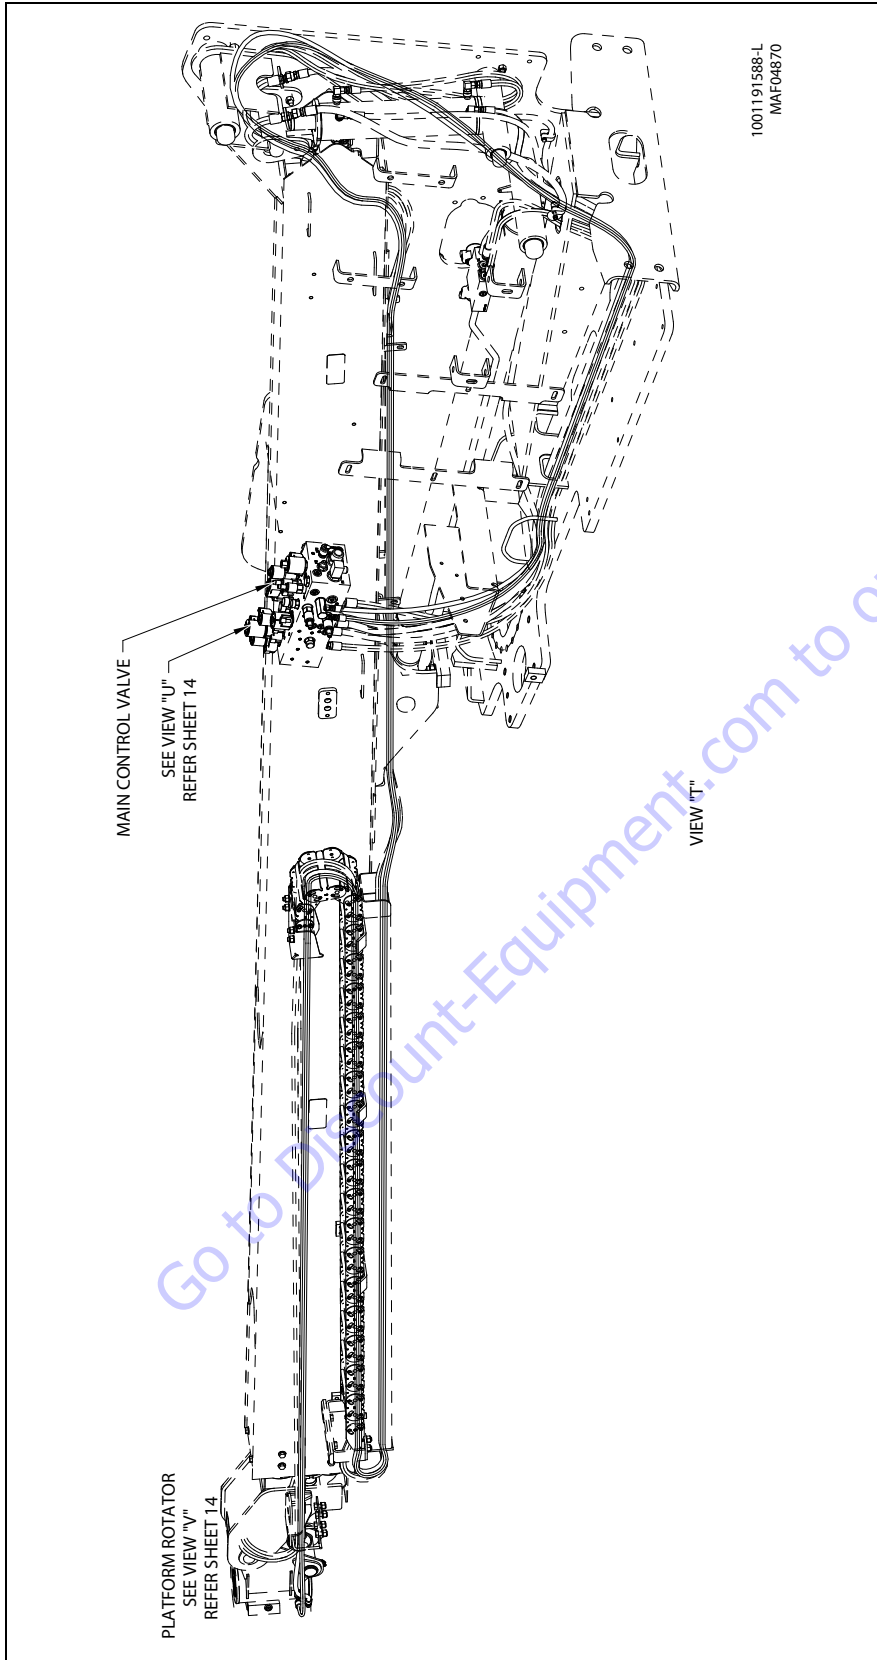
Hydraulic System Installation (400SC) - Sheet 13 of 16
